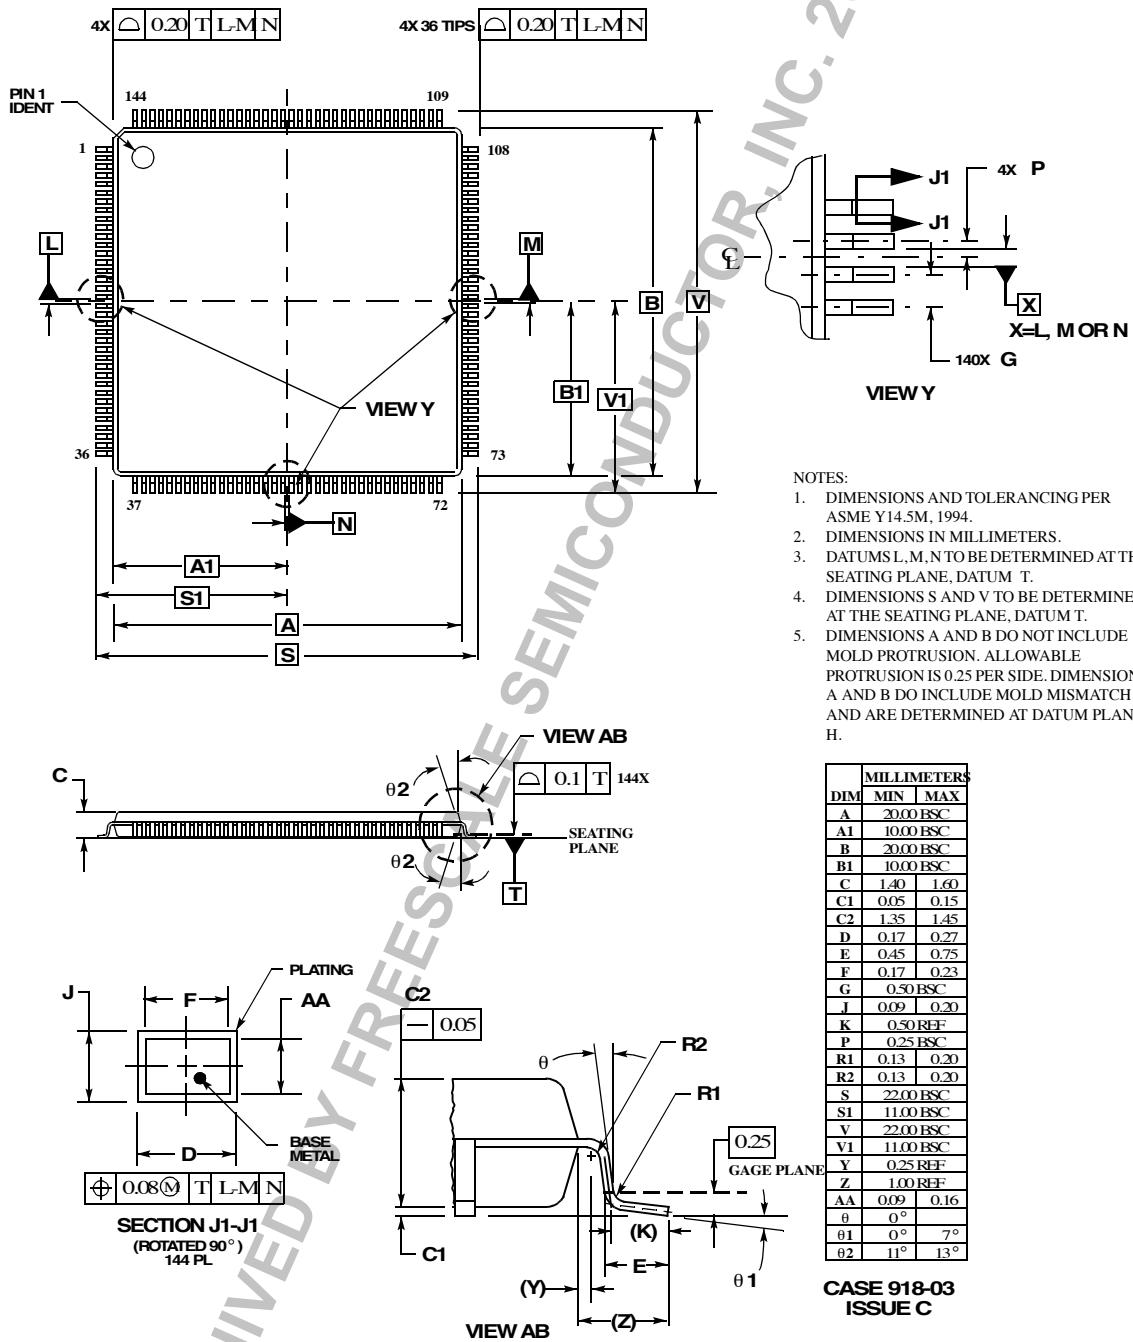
MC68VZ328 TQFP Mechanical Drawing
